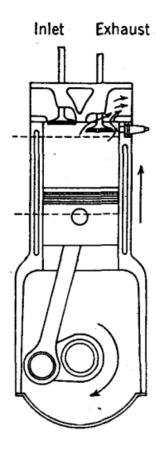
Diagram showing the exhaust process in a 4 stroke internal combustion engine [2]
